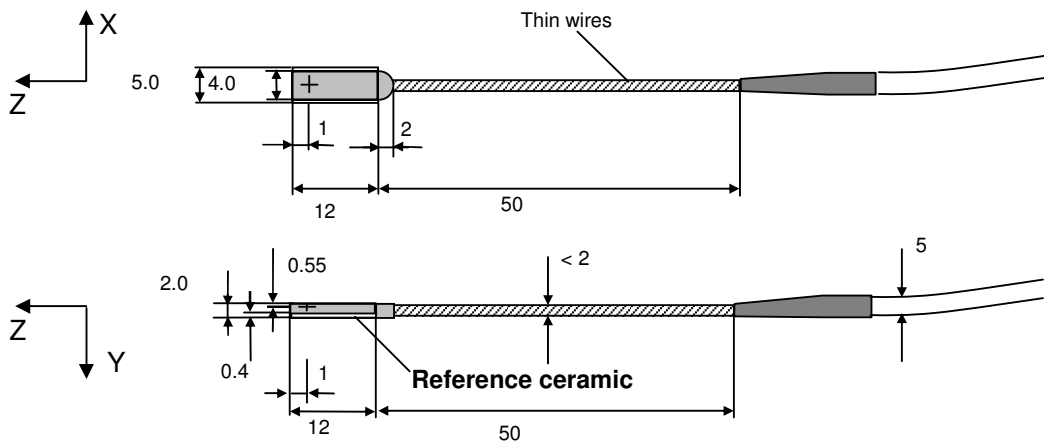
Probe dimensions and position of active zone for the Single-Axis Magnetic Field Hall Transducer YM12-3-2-2T (module H). All measures are in millimeters.
